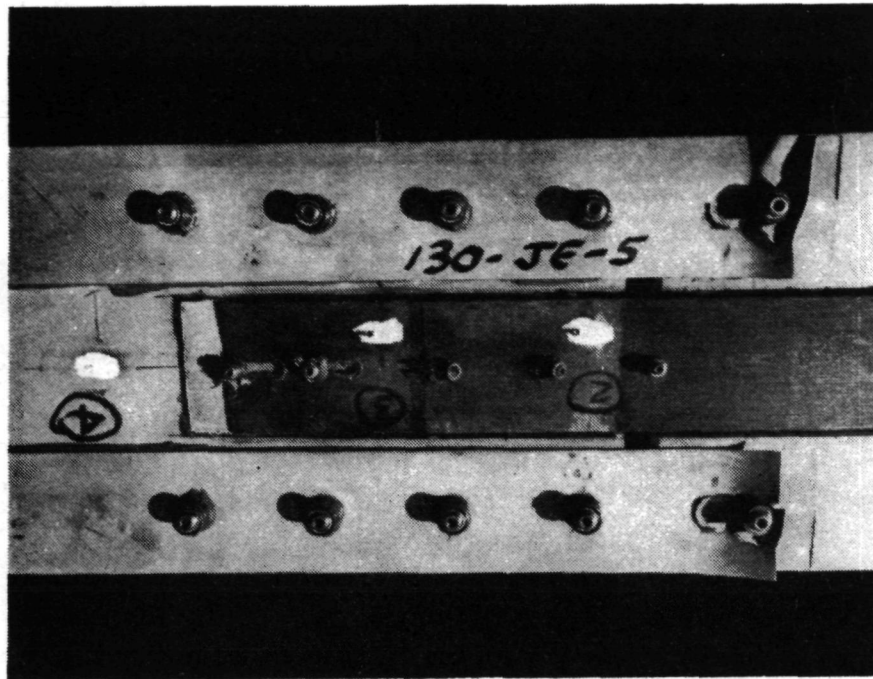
130-JE-5 FAILURE, LAMINATE SIDE
